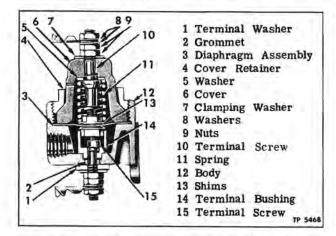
Low Air Pressure Switch (Bendix-Westinghouse)
